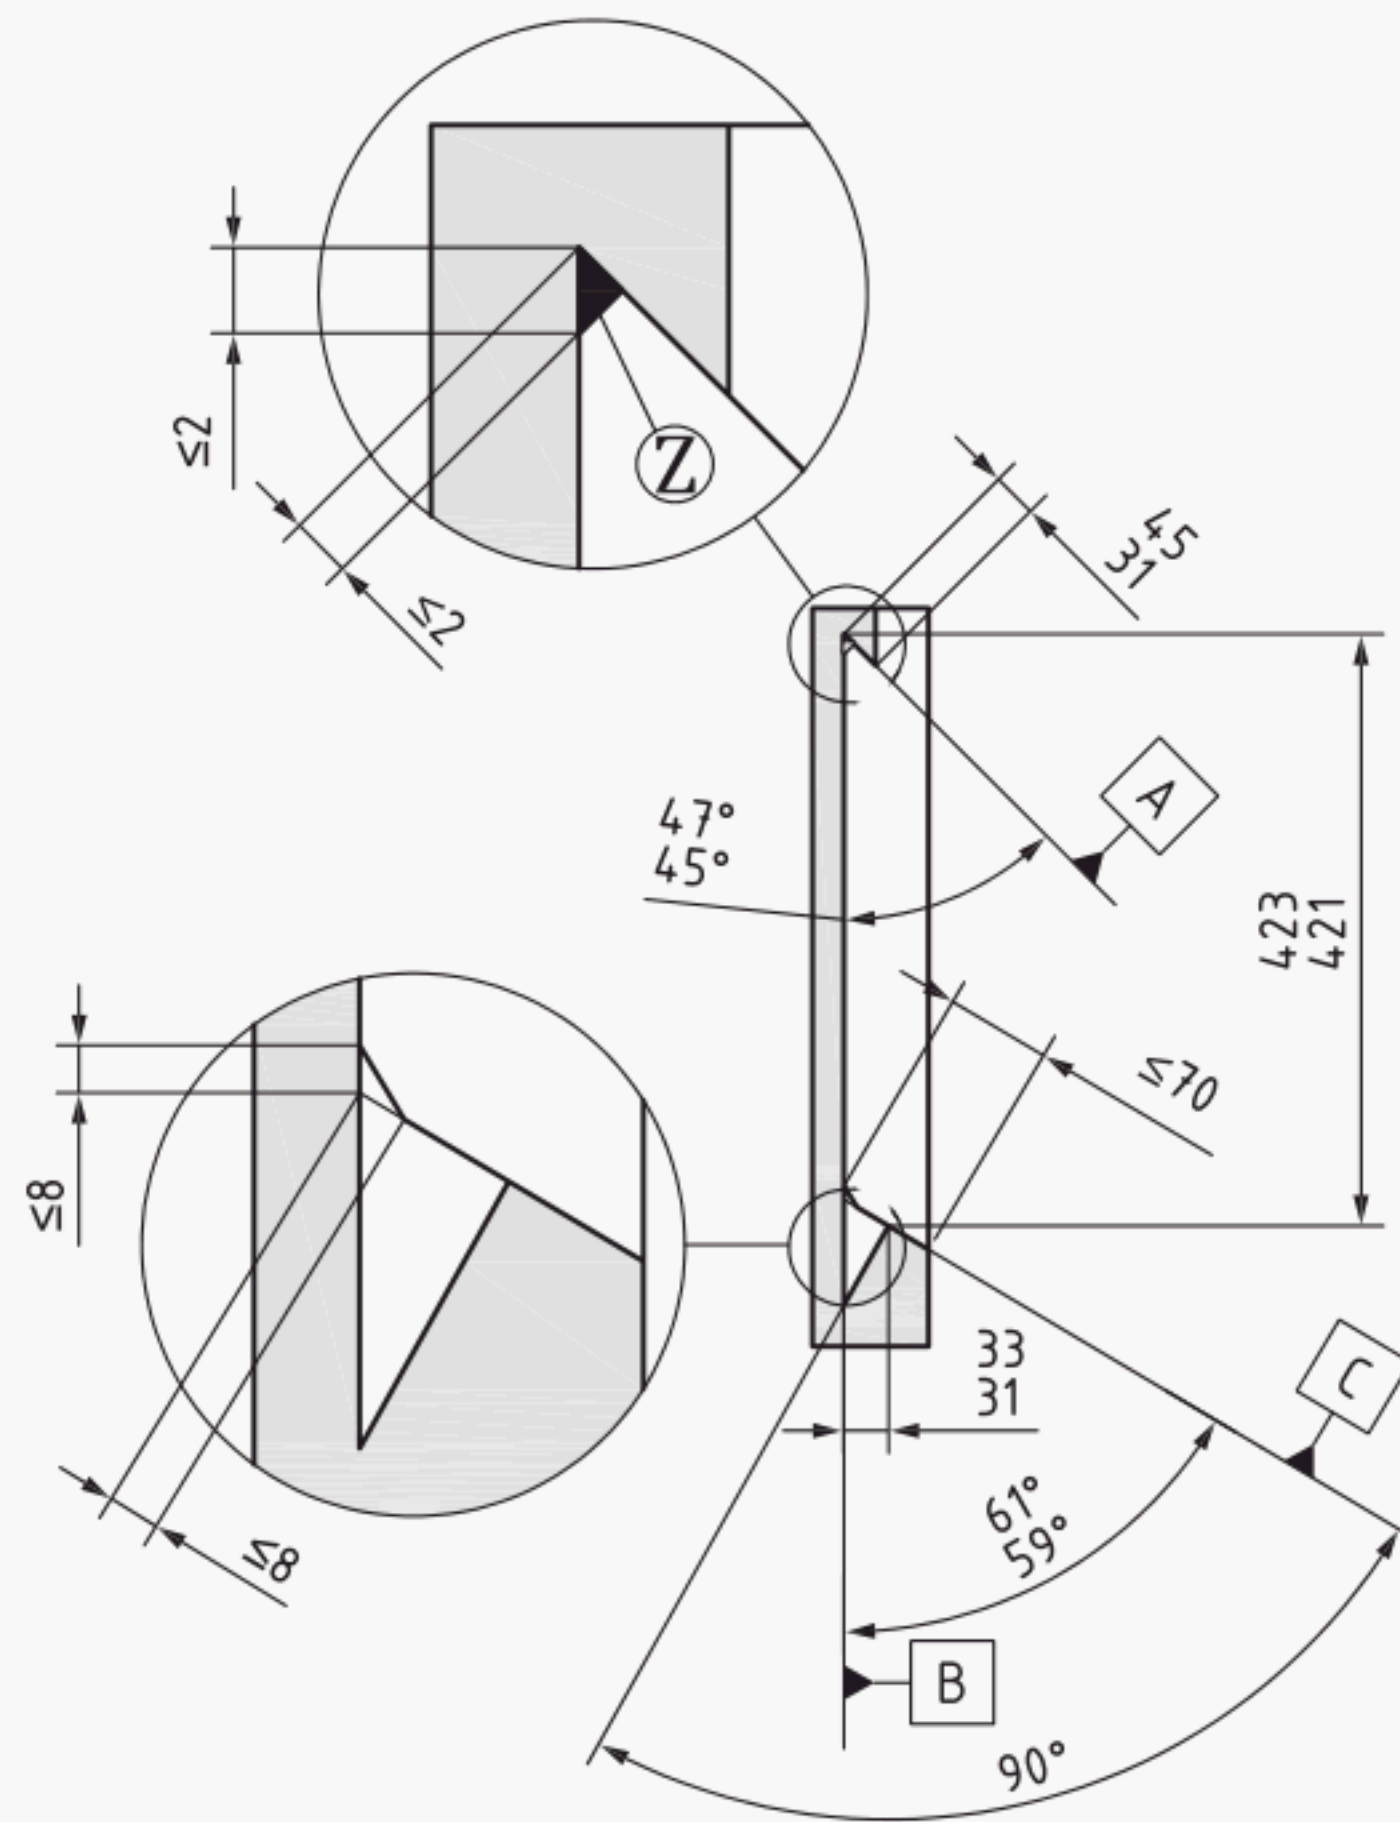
Attachment mounting frame — Section A-A (See [Figure 3](#))
